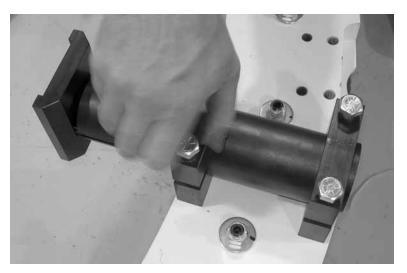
After positioning the leg, tighten the clamping block bolts to secure it.
